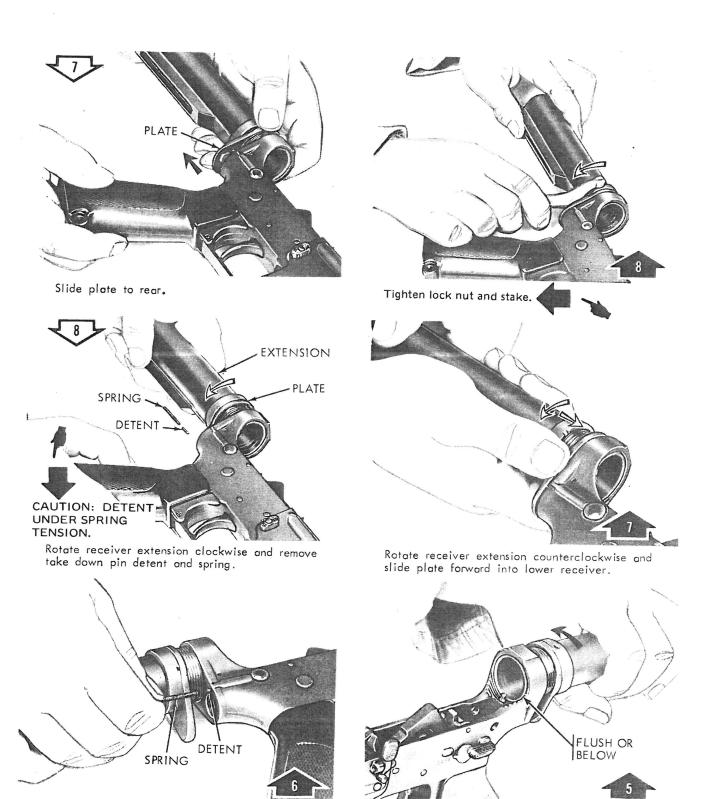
Disassembly/Assembly of Submachine Gun (Sheet 2 of 3)
